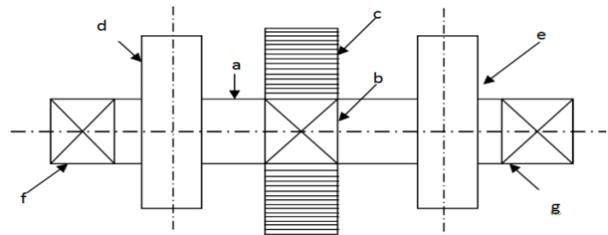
Representation of 7 part Gear assembly [a-shaft; b-bearing; c-gear, d-Arm, and e-Arm, f-nut, g-nut]
